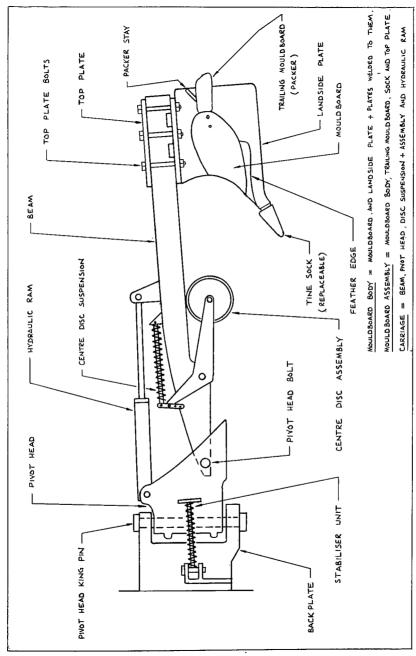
Components of mounted forest plough carriage with small pivot head assembly and S45/T60/m mouldboard assembly.
